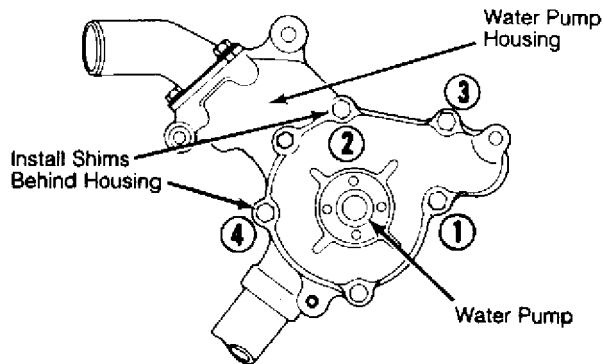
Installing Water Pump Housing on 1.3L Engine
